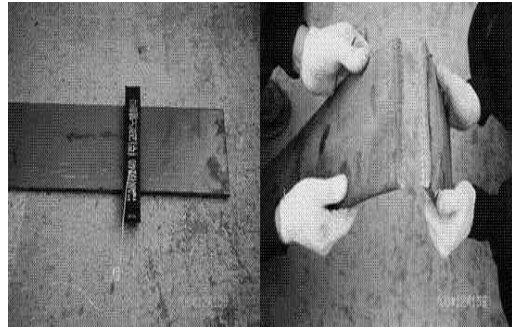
Cut 10mm steel plate (explosive:350g/m)
